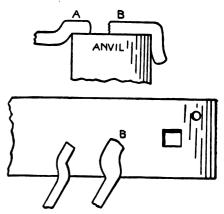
, 81 and 82. LADLE, BLANK AND METHOD OF SHAPING BOWL.
